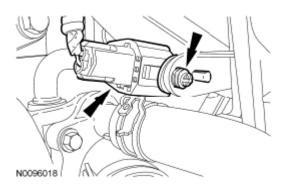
Locating KS Electrical Connector And Wiring Harness Pin-Type Retainer Courtesy of FORD MOTOR CO.
